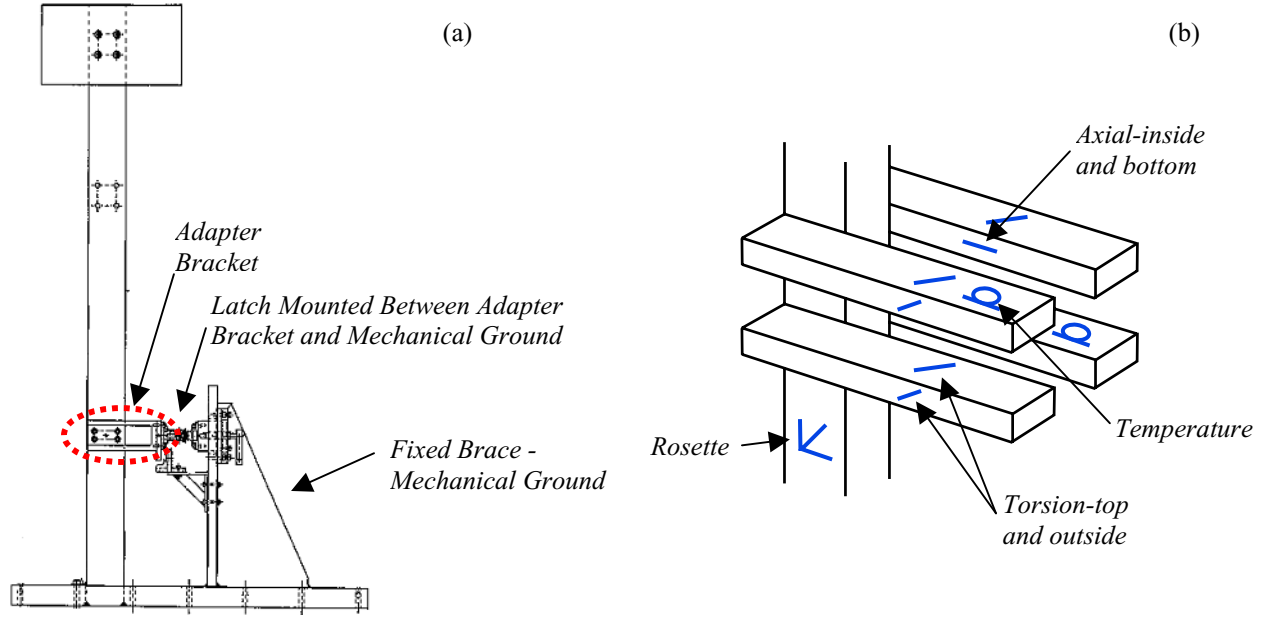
(a) Drawing of the spacecraft latch test fixture showing the adapter bracket where the FBG strain sensor array was mounted and (b) drawing of the adapter bracket with the latch mounting plate removed for clarity, showing the positions of the FBG strain and temperature sensors.
